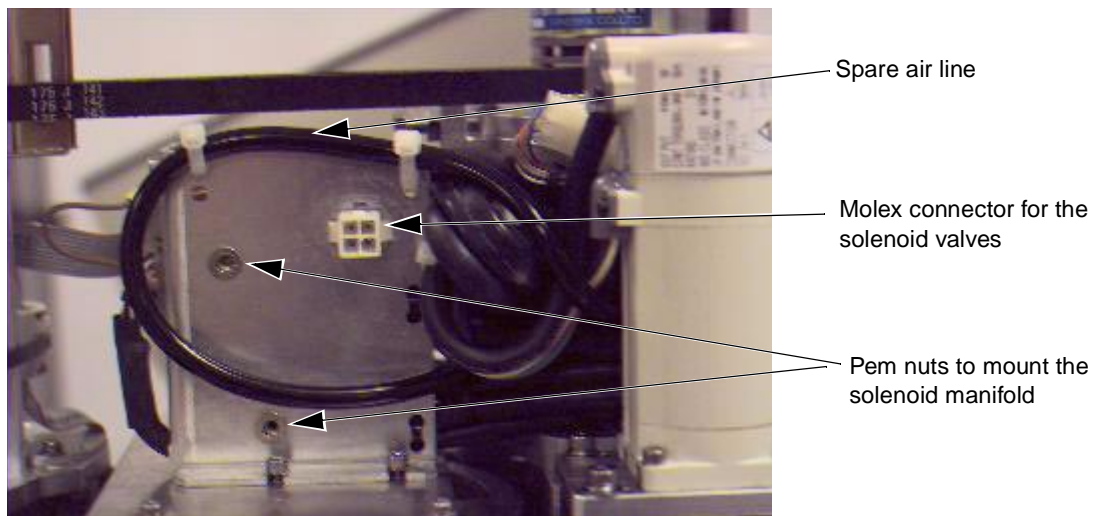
Solenoid Mounting Bracket With Connector and Spare Air Line
